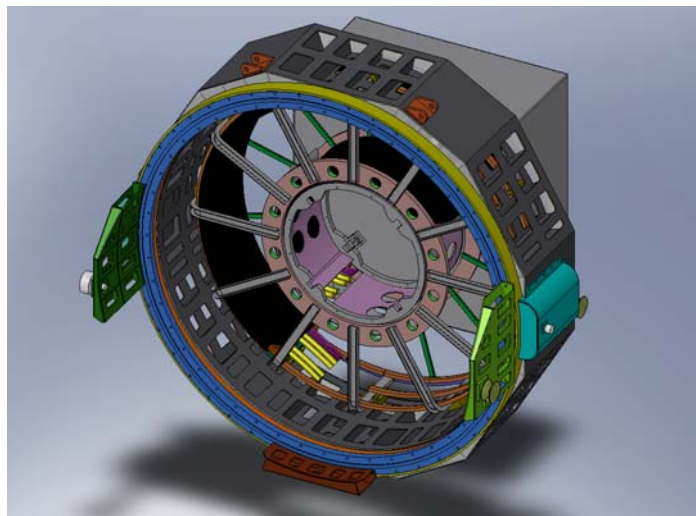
Front $\frac{3}{4}$ view of the Rotator Module, Cable wrap and Electronics Cabinet Assemblies
